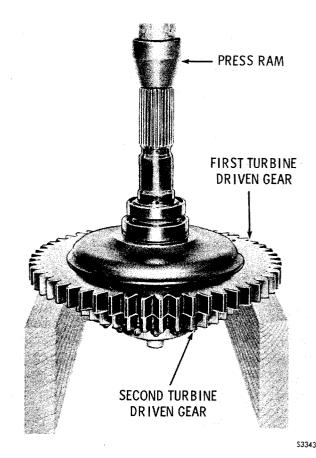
Pressing second turbine gear from freewheel clutch assembly
